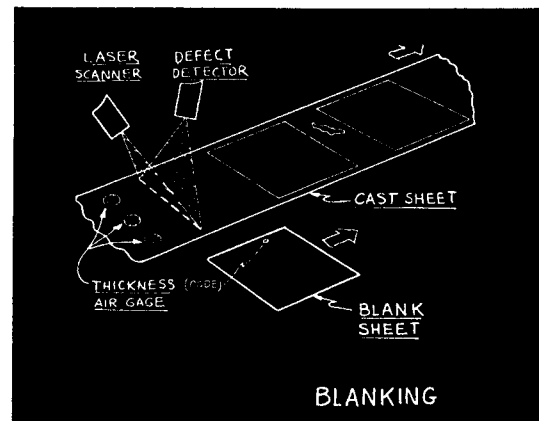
Blanking tool, showing the laser scanner with defect detector.
